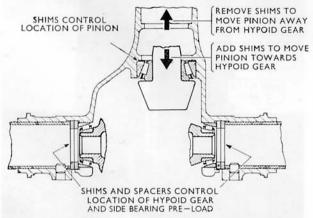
Showing the location of shims interposed between the pinion rear bearing outer race and housing and between the differential side bearing spacers
